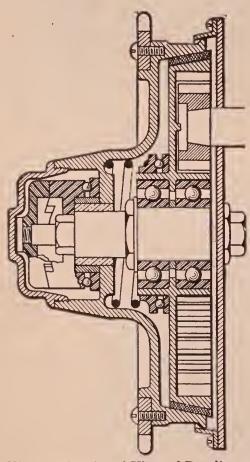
Sectional View of Reading-Standard Cone Clutch
